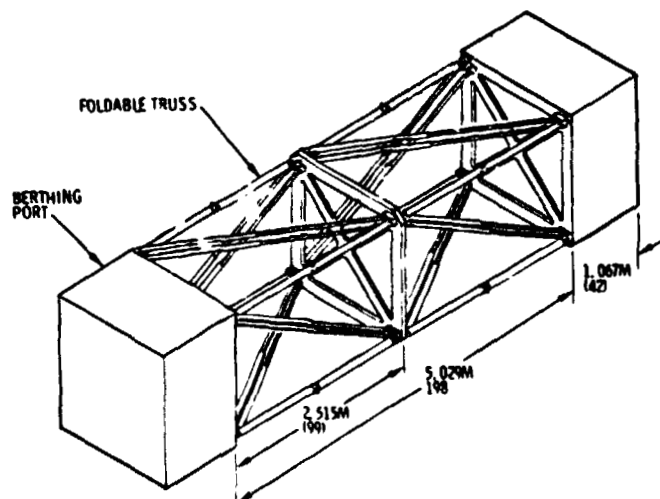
Berthing Ports Assembly TYP Three Places
